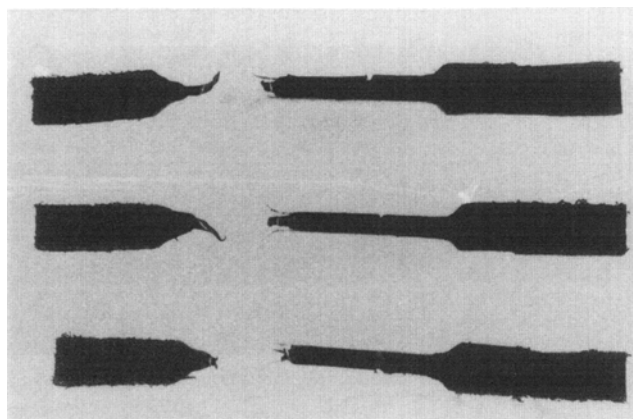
Failure location for the tensile specimens of the electro-fusion joined pipes
